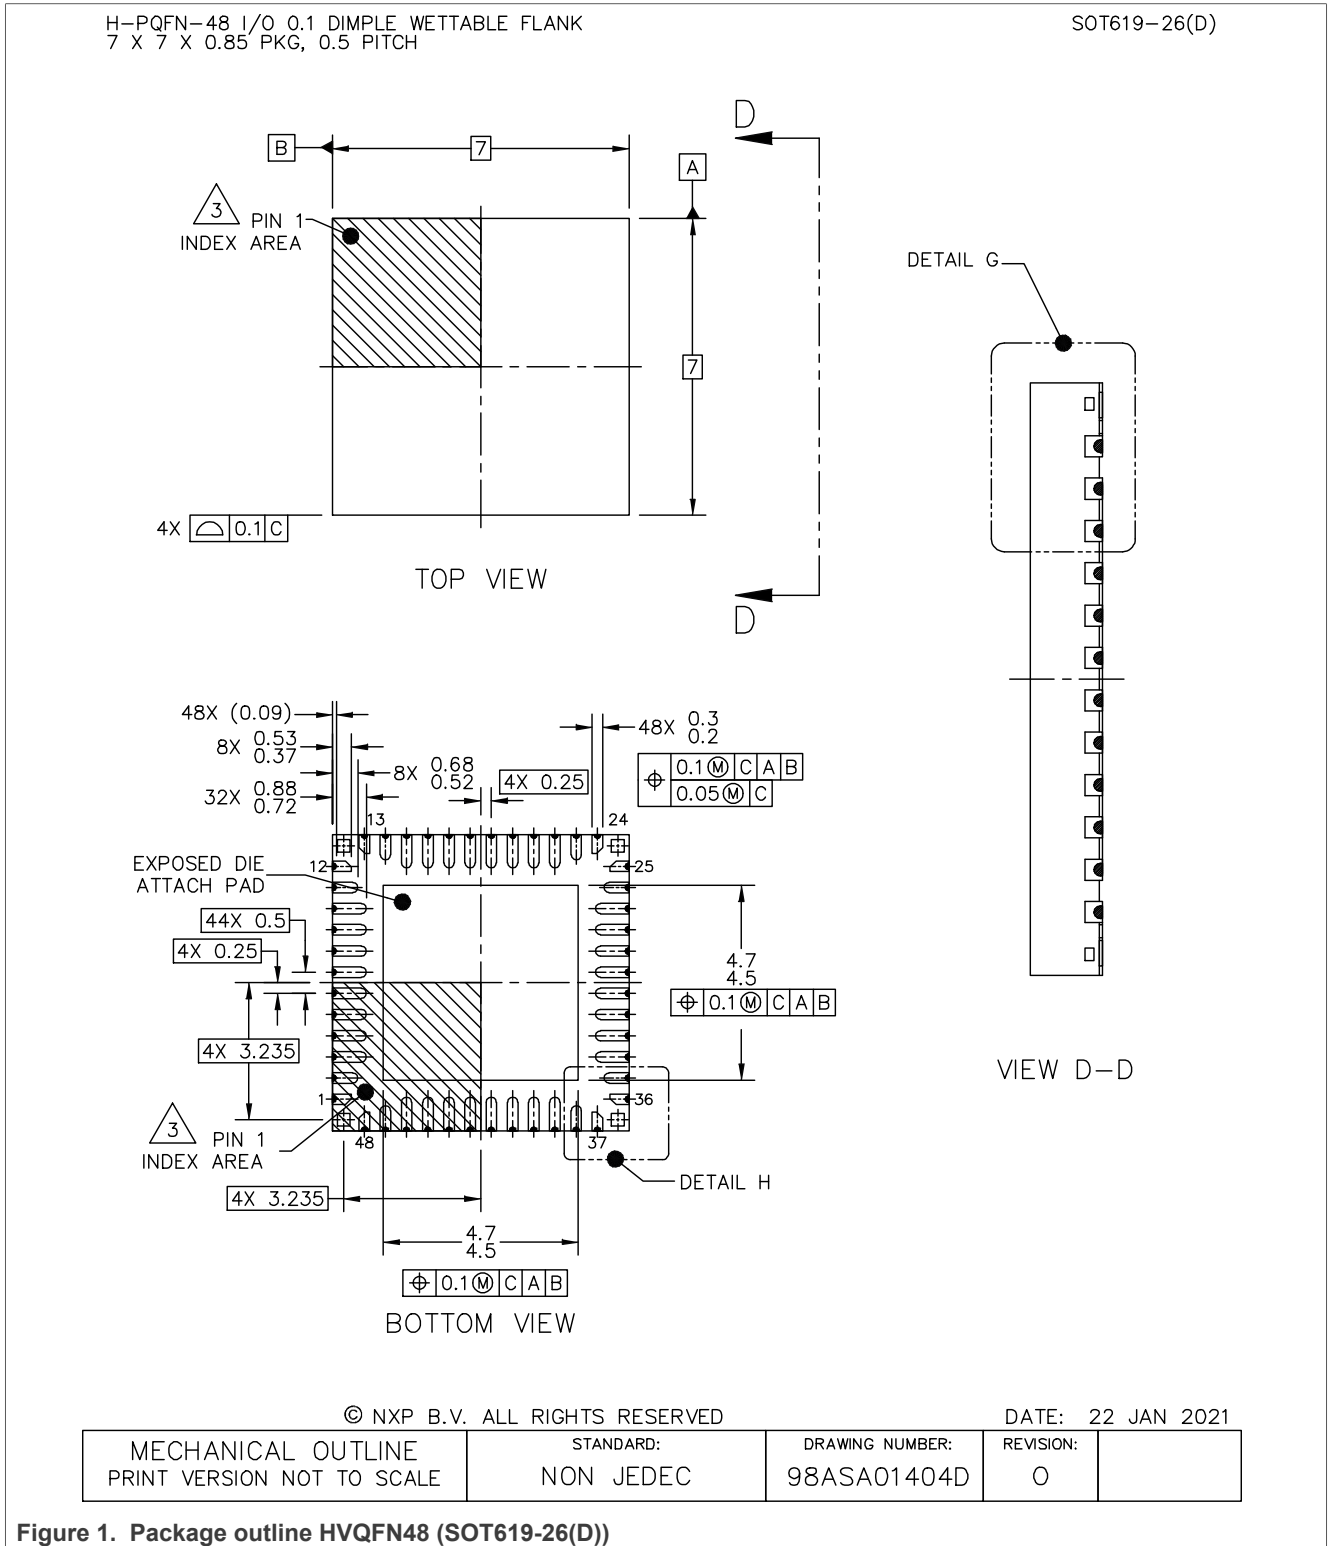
Package outline HVQFN48 (SOT619-26(D))
